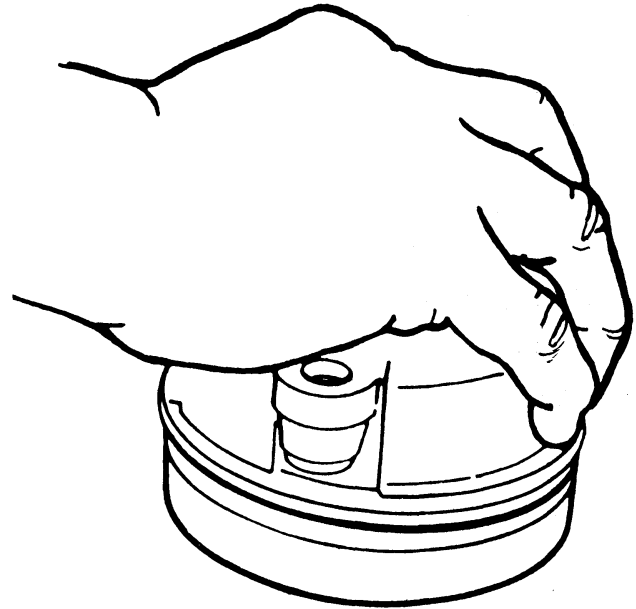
Slamming the Housing Plate on a Surface to Remove Lower Plate and Belleville Spring
